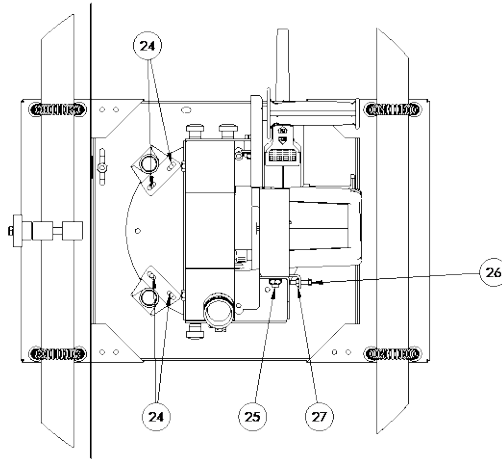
Adjusting Blade Perpendicularity (C & H Series shown)
